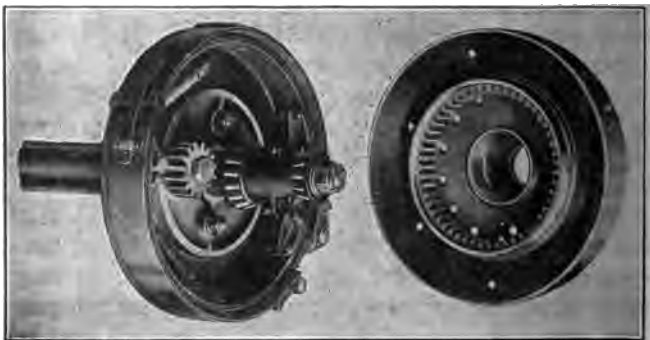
Operating Parts of Internal Gear Rear Axle.
